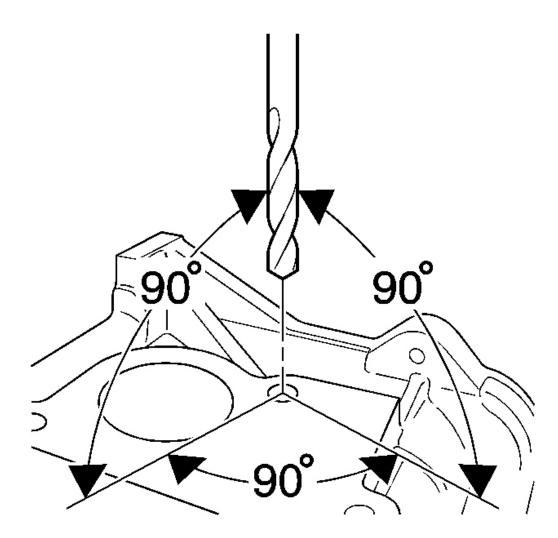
Identifying Proper Drilling Angle Courtesy of GENERAL MOTORS CORP.
